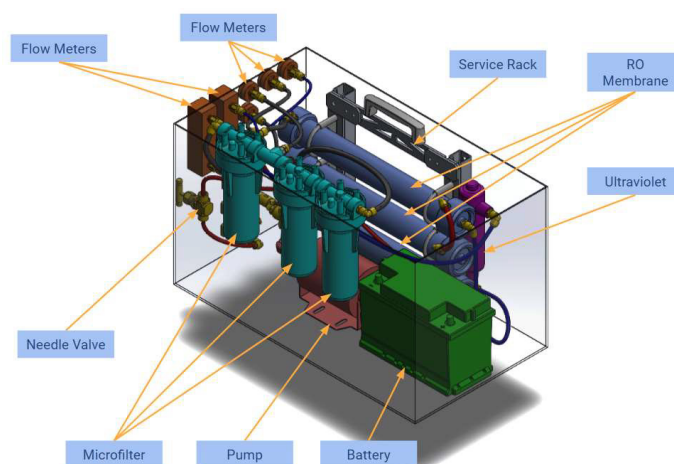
SolidWorks Rendering of System Packaging and Hydraulic Circuit Configuration
